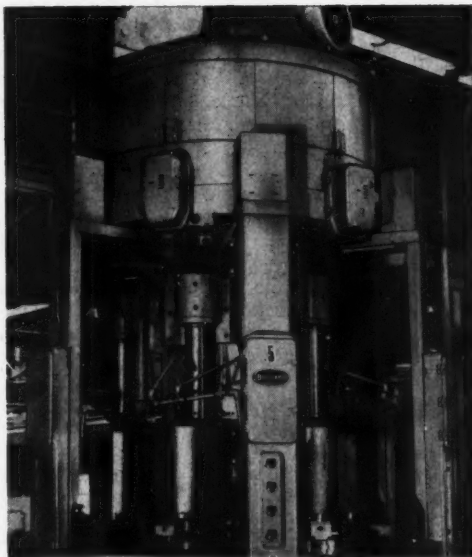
On this 6-spindle vertical chucking automatic the motor-case forging blanks are machined in preparation for flow turning. The operations are carried out at two separate set-ups
